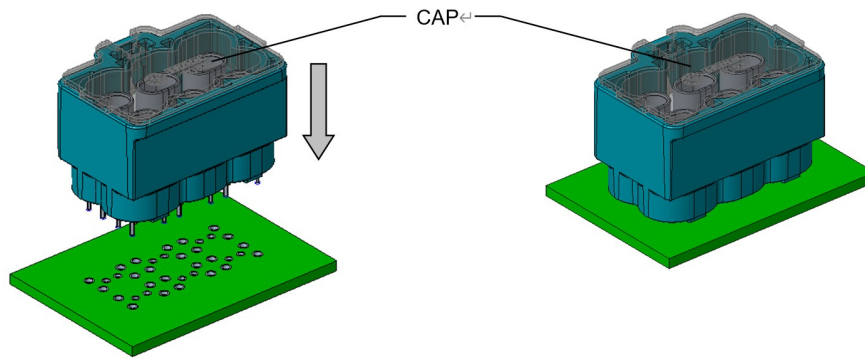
/ Pin Header 6P 180° unsealed, w/o cap, TE-No. 2390045
